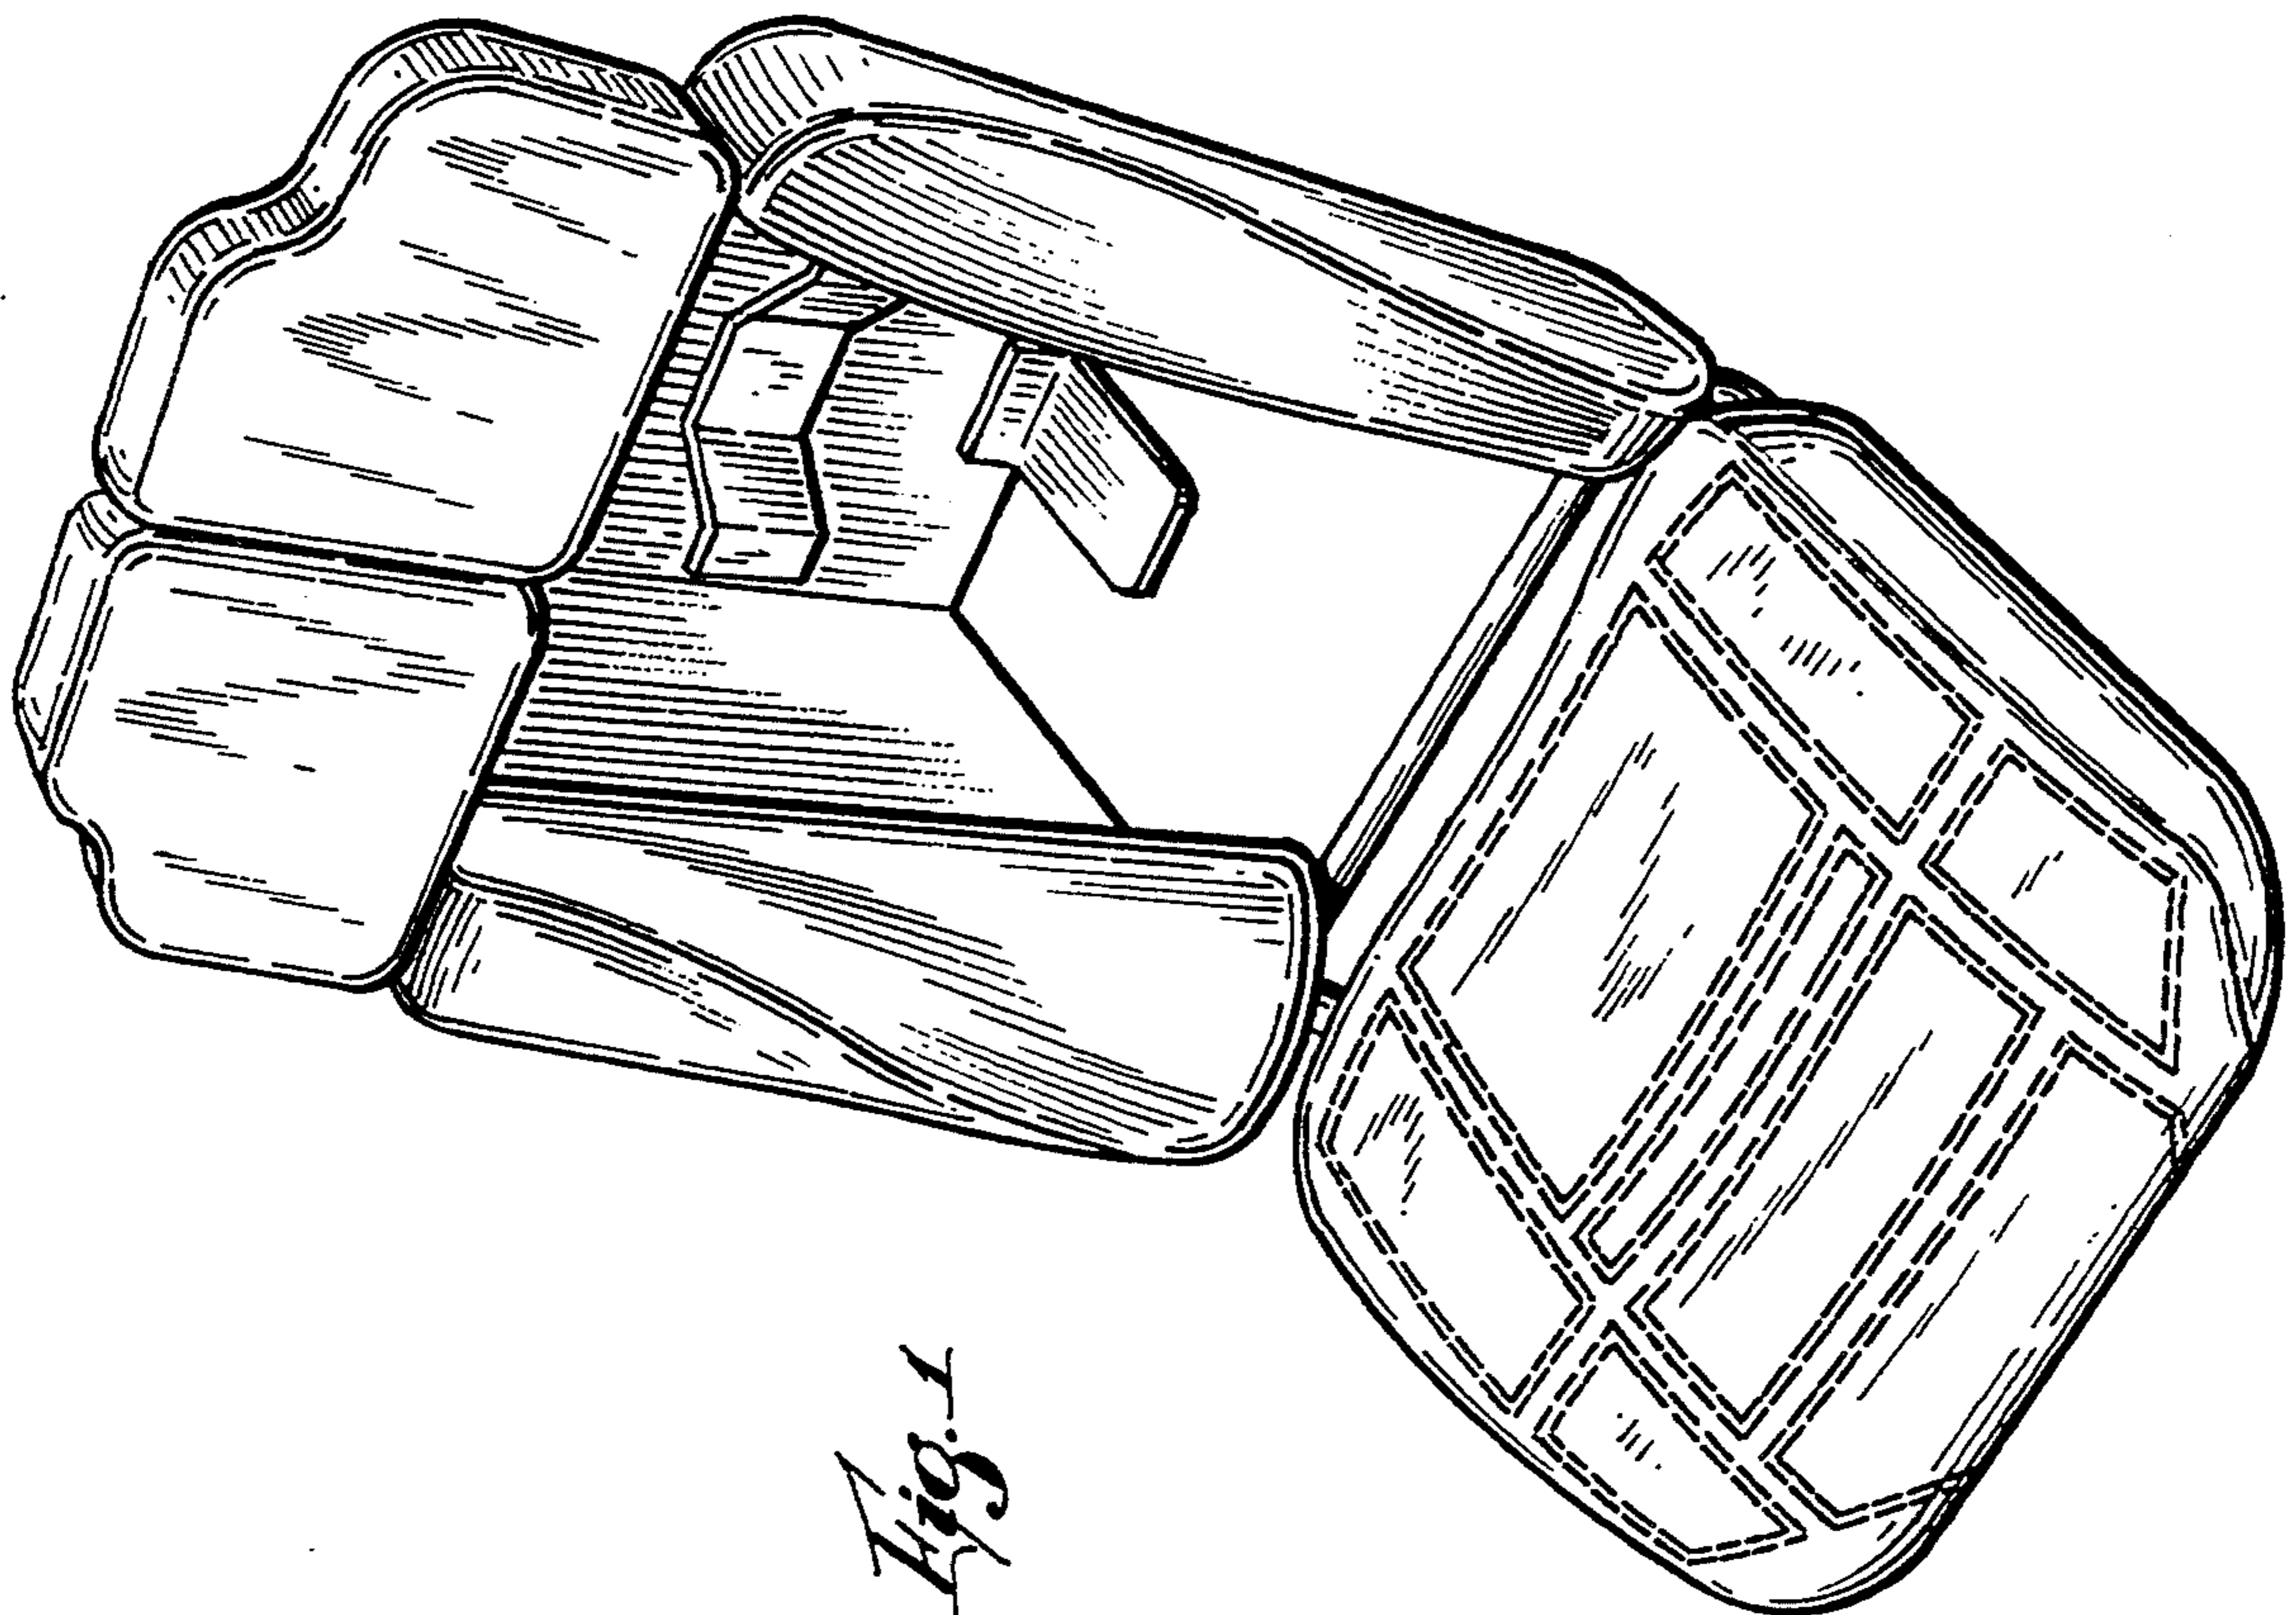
is a perspective view of a seat for self-contained breathing apparatus showing our new design; FIG. 2 is a top plan view of the seat shown in FIG. 1; FIG. 3 is a right side elevational view of the seat shown in FIG. 1; FIG. 4 is a front elevational view of the seat shown in FIG. 1; FIG. 5 is a rear elevational view of the seat shown in FIG. 1; and, FIG. 6 is a bottom plan view of the seat shown in FIG. 1.
